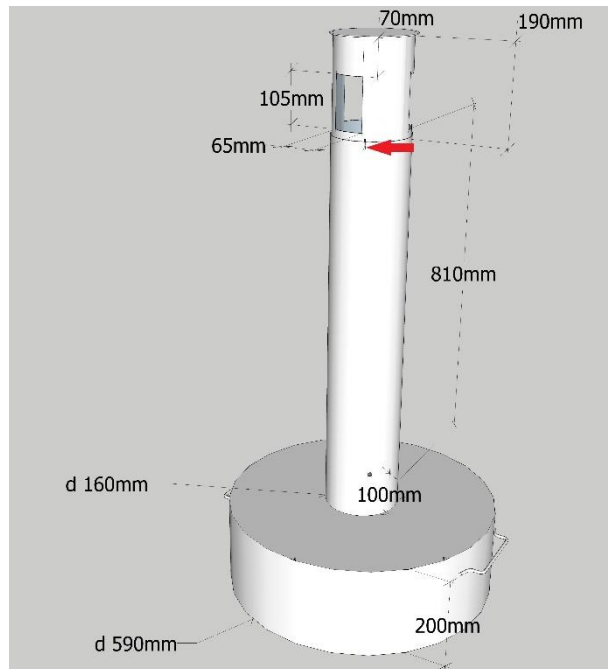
Blueprint with the dimensions of the chimney drum and the exhaust pipe.
